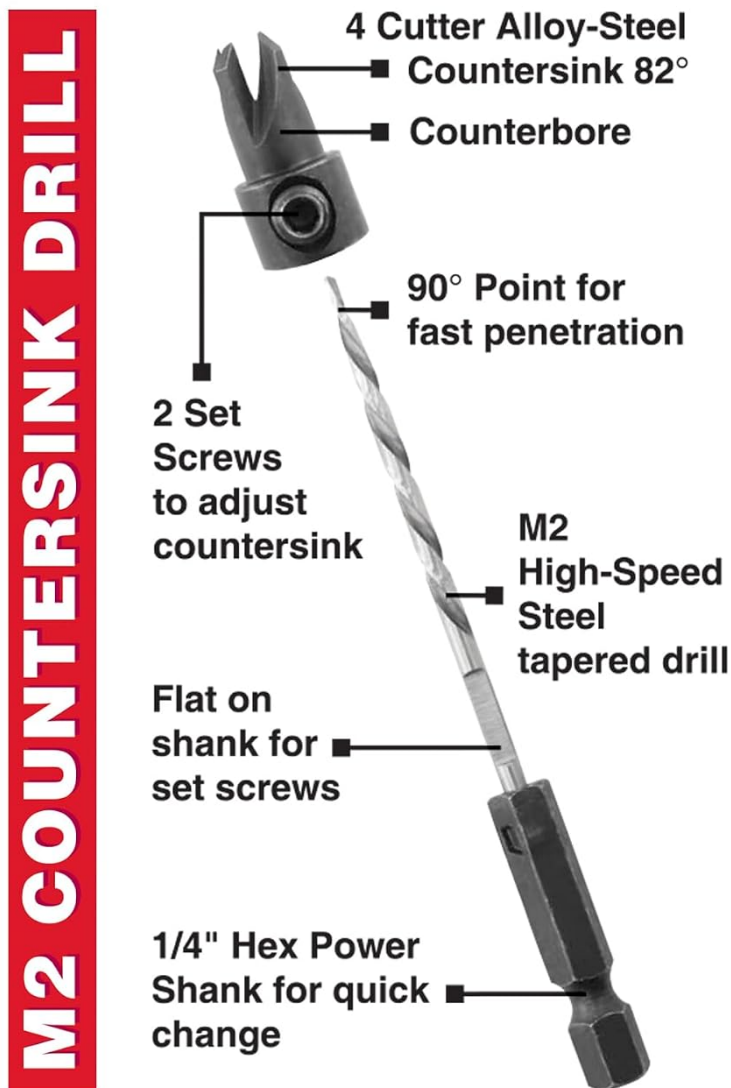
Detailed view of a single M2 Countersink Drill, highlighting the 4-cutter alloy-steel counterbore, 82-degree countersink, 90-degree point, M2 High-Speed Steel tapered drill, flat on shank for set screws, and 1/4" Hex Power Shank.
